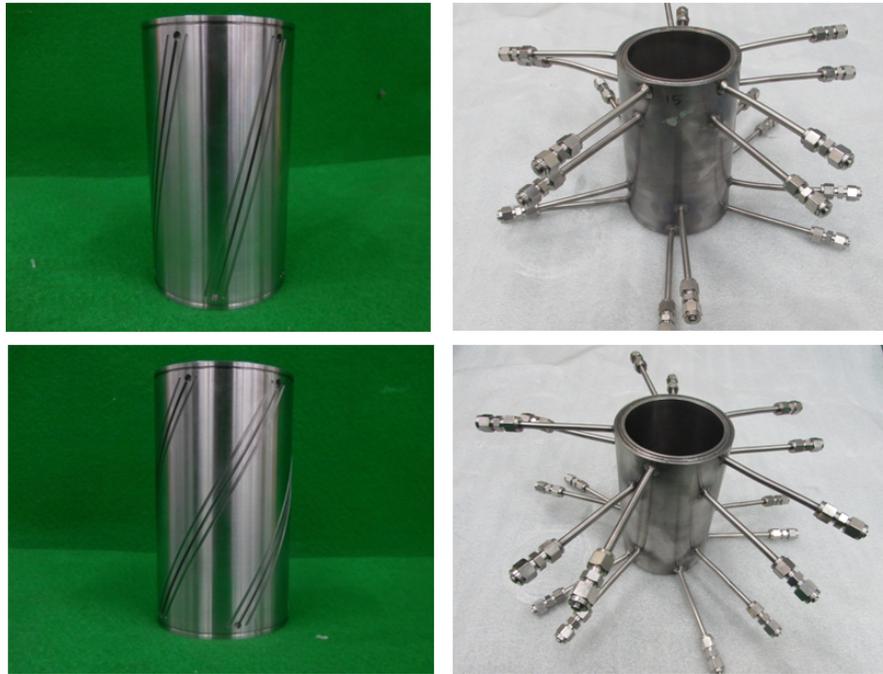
Photographs of the manufactured helical cooling channel (upper: 15° lower: 30°)
